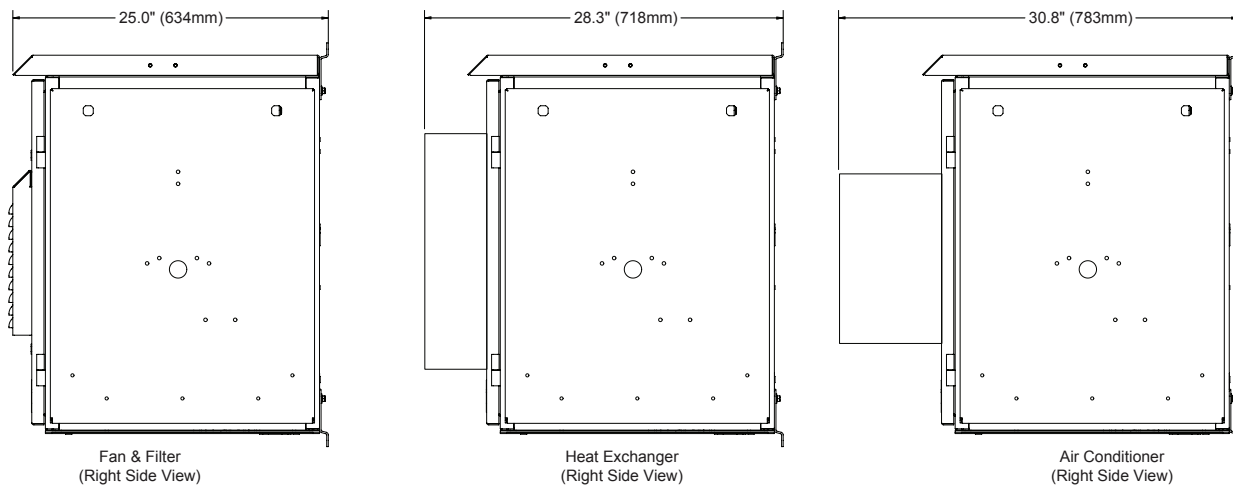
, FBE2322-ENC Environmental Control Options Side Dimensions
